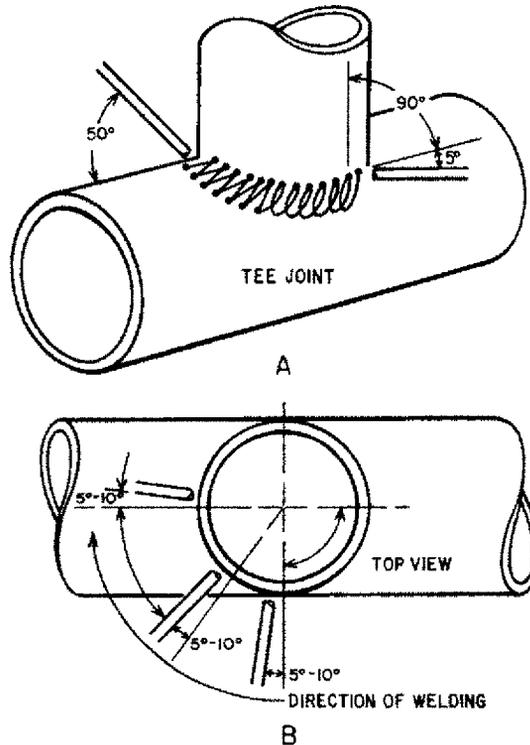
A. Weave pattern for welding a T-joint with intersecting pipe on top; B. Electrode angle for welding the T-joint.
